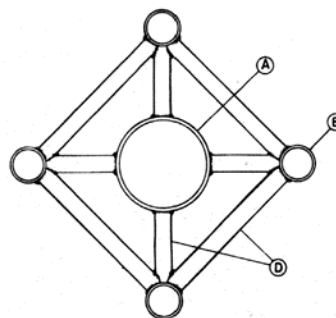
Fuselage Hoisting Sling Details, Stations 6 to 11
